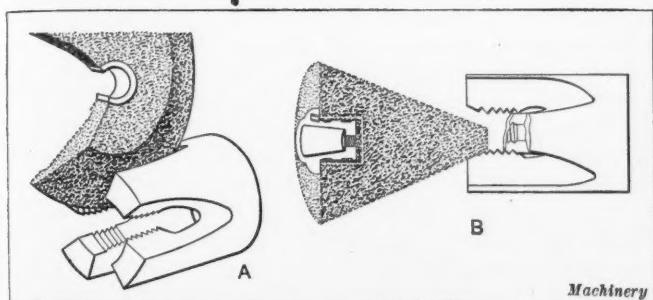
Diagram showing Grinding Wheels used, and Methods of sharpening Spring Screw Threading Dies on Faces of Lands and in Throat
